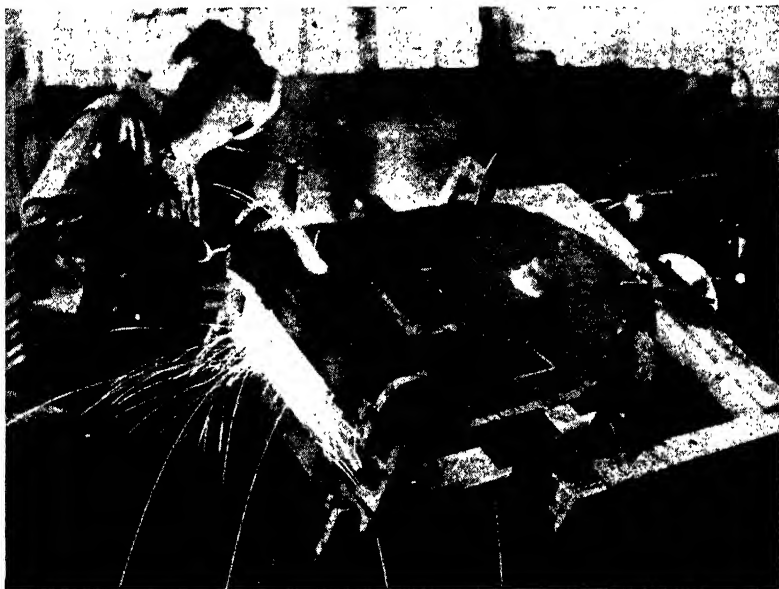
This fixture is an adaptation of the one shown in Fig. 104, so that parts may be rotated into any position required for strictly down-hand welding. Note the simple hold-down clamps and locating stops on the fixture which is suspended on a secondary axle crosswise to the direction of the primary axle. (Courtesy of R. G. LeTourneau, Inc.)
